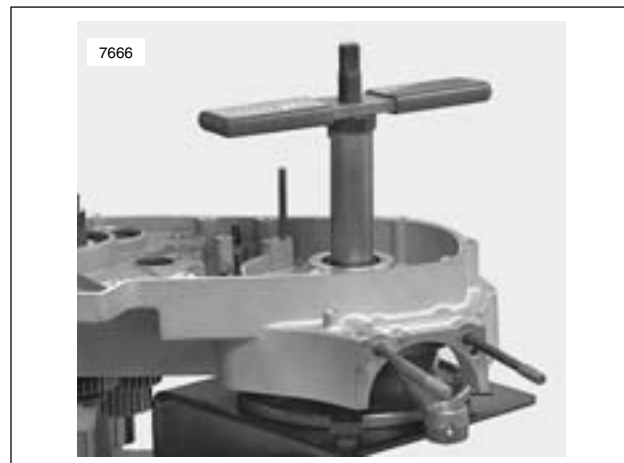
Installing Flywheel Spacer and Outer Bearing
